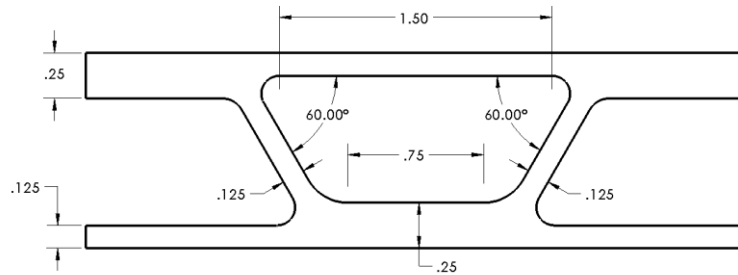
Trapezoidal dimensions in inches for corrugated structure.
